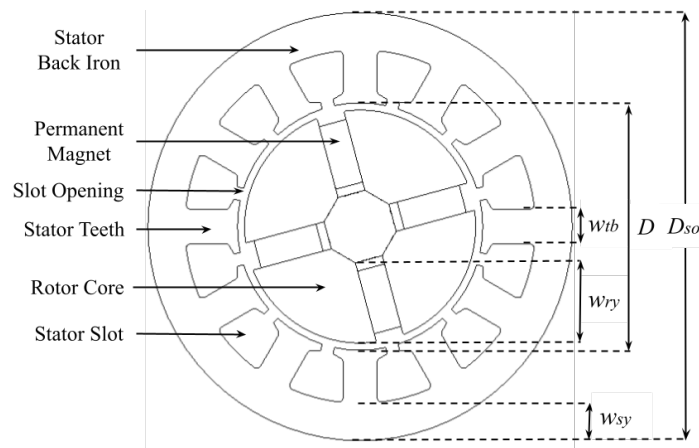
Cross-sectional view of a typical radial-flux inner rotor spoke-type IPMSM.
